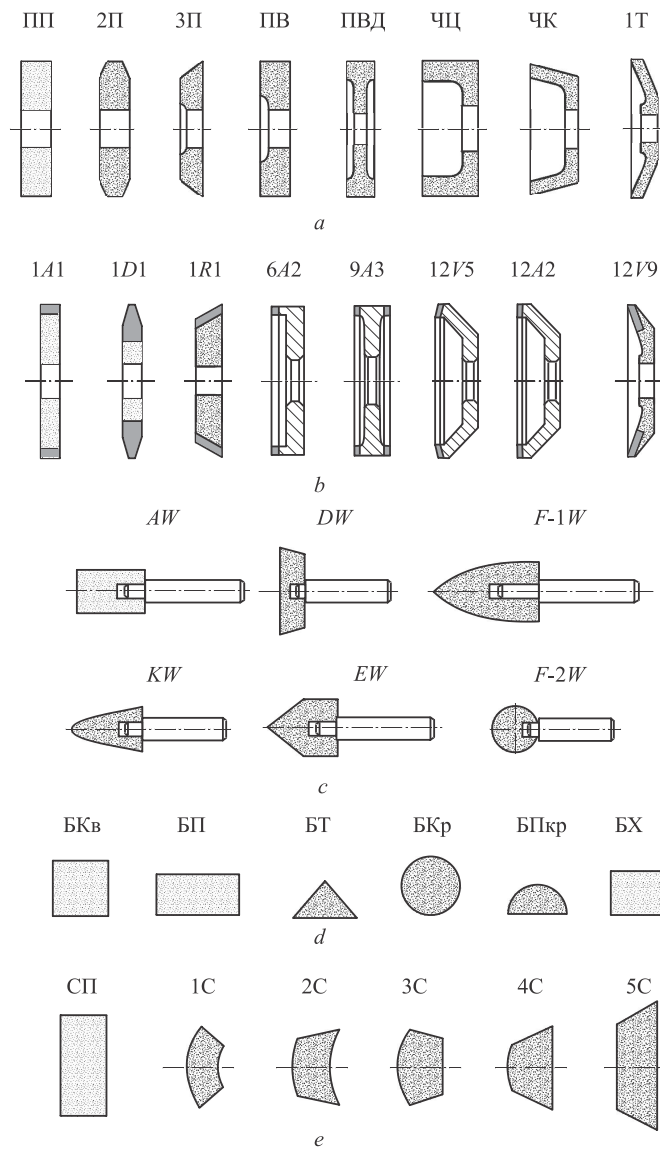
Abrasive tools: (a) grinding wheels; (b) diamond and CBN wheels; (c) grinding heads; (d) grinding bricks; (e) grinding segments
